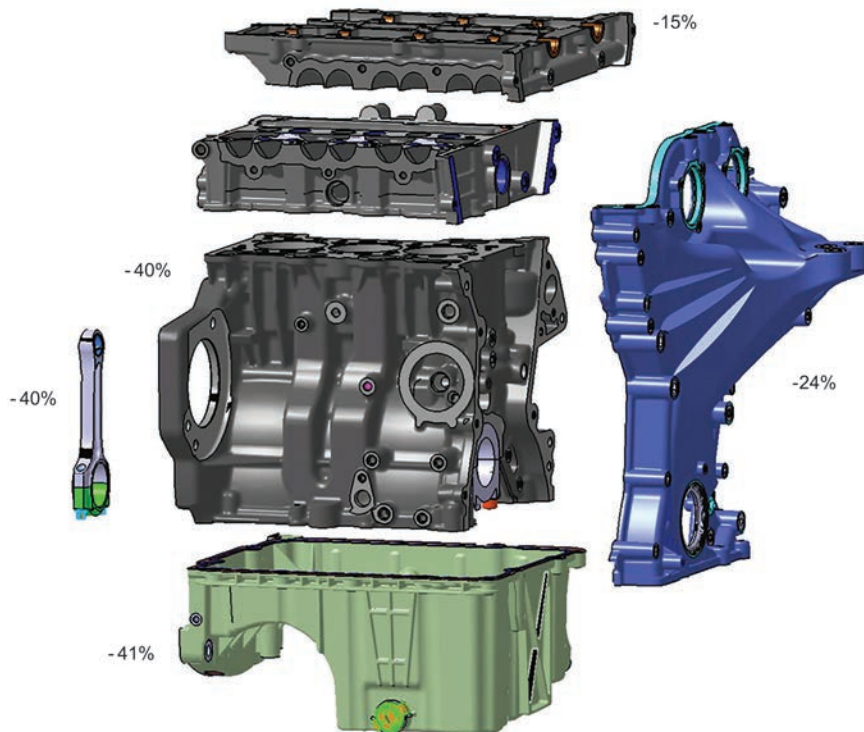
Design lightweight engine action for the 1.0-liter Fox Engine.
